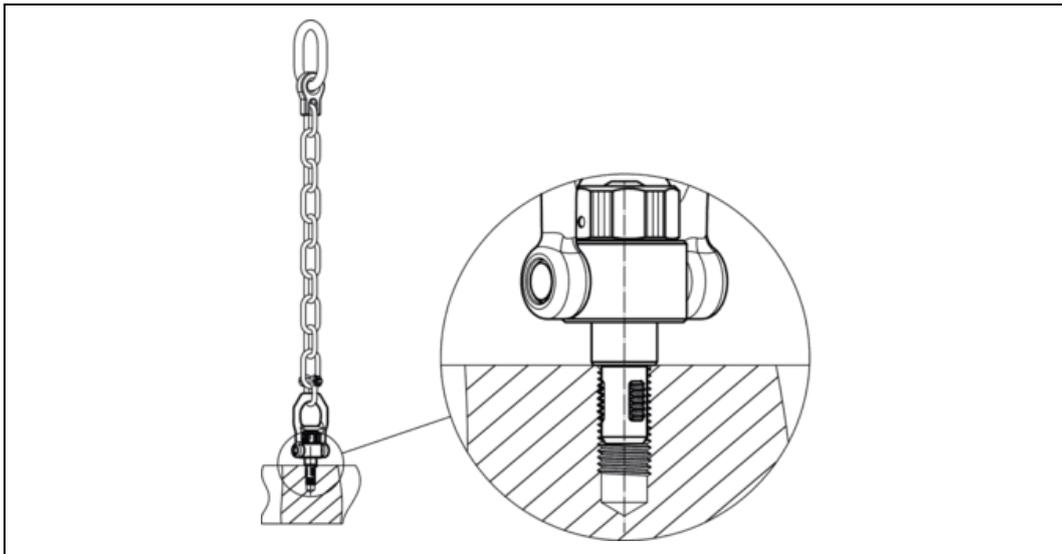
Installation examples - threaded lifting pins, self-locking, with rotatable shackle
